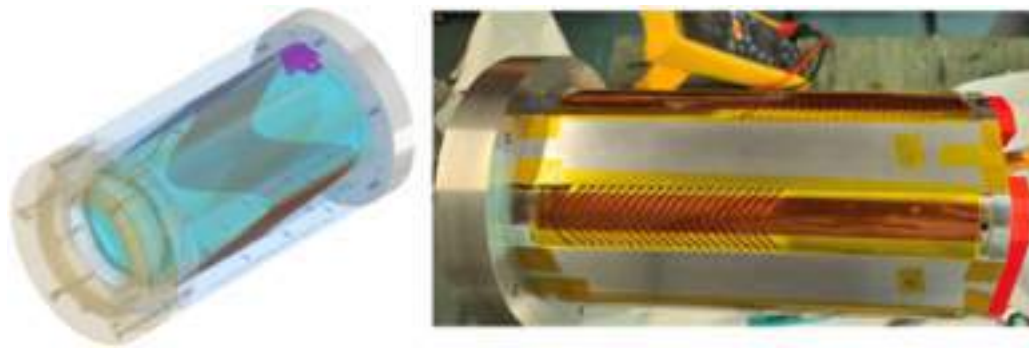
The HTS4 sextupole demonstrator: left: CAD design; right: the magnet after winding, before the assembly of its aluminium sleeve
